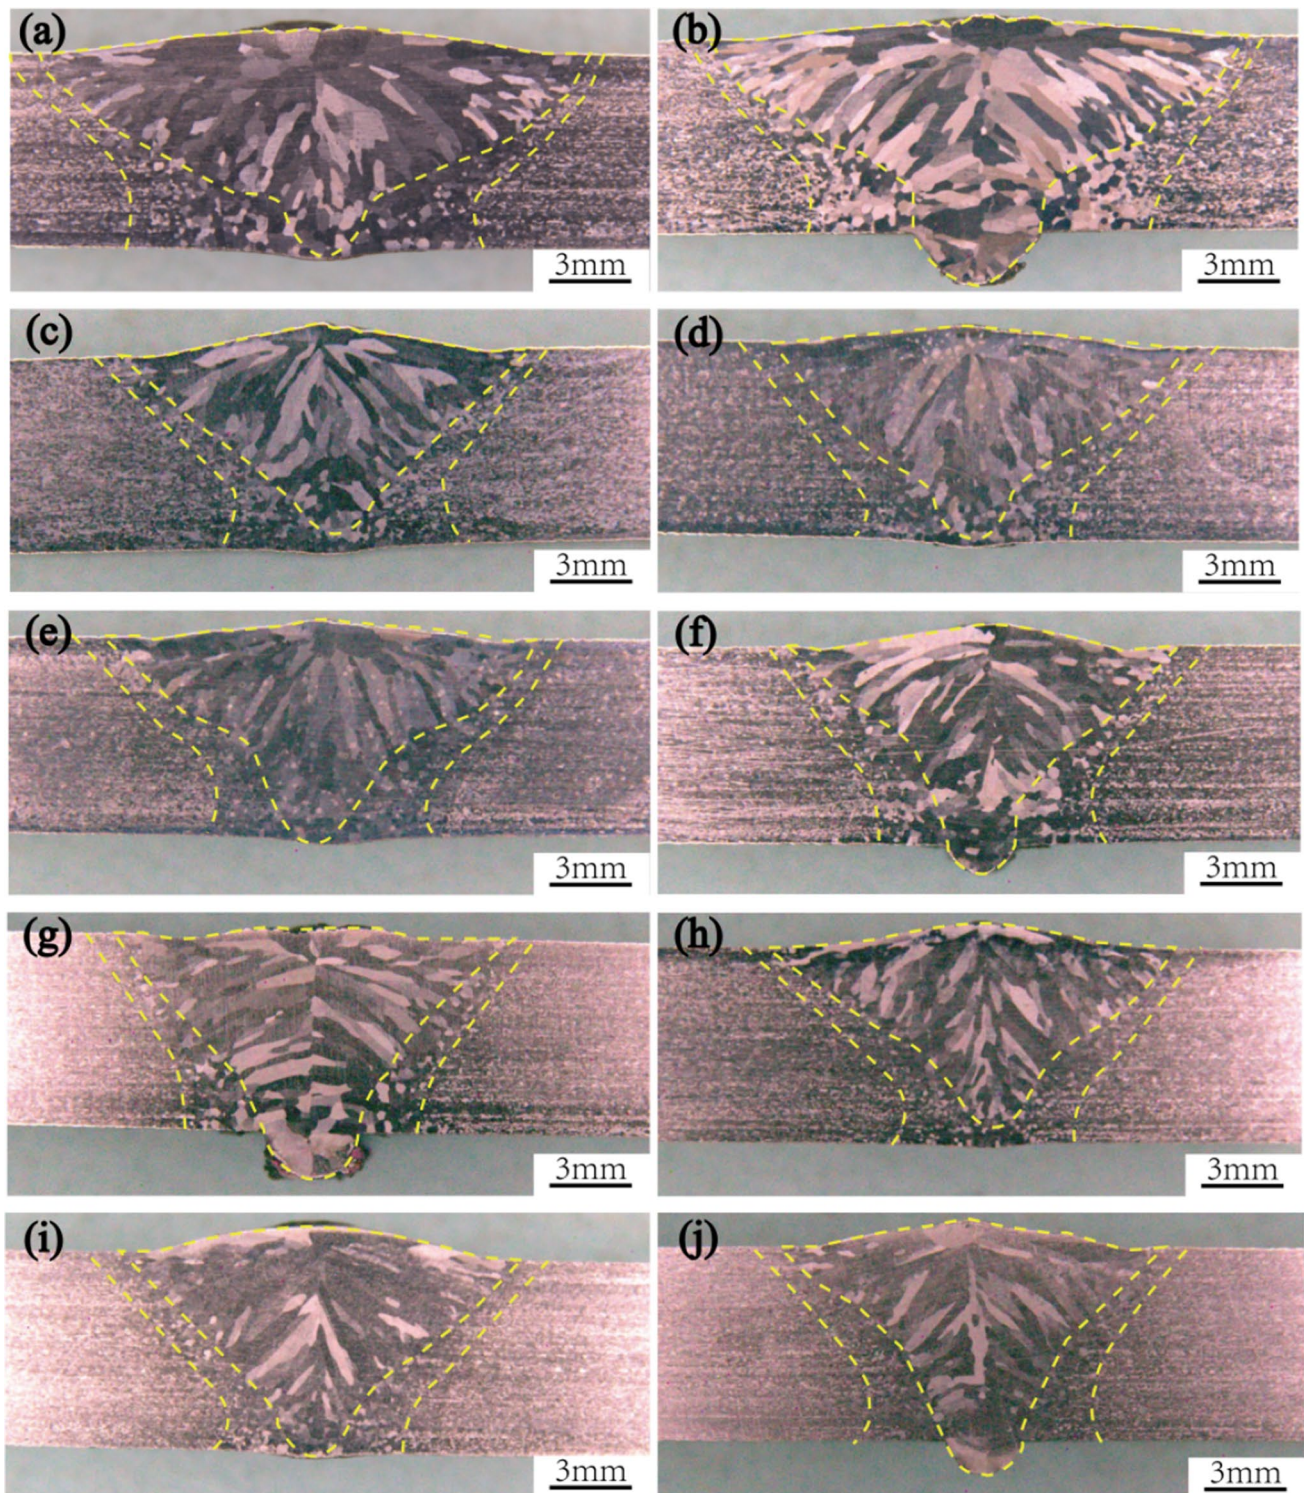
AISI 444 FSS high-frequency pulse K-TIG weld appearance under different welding parameters
